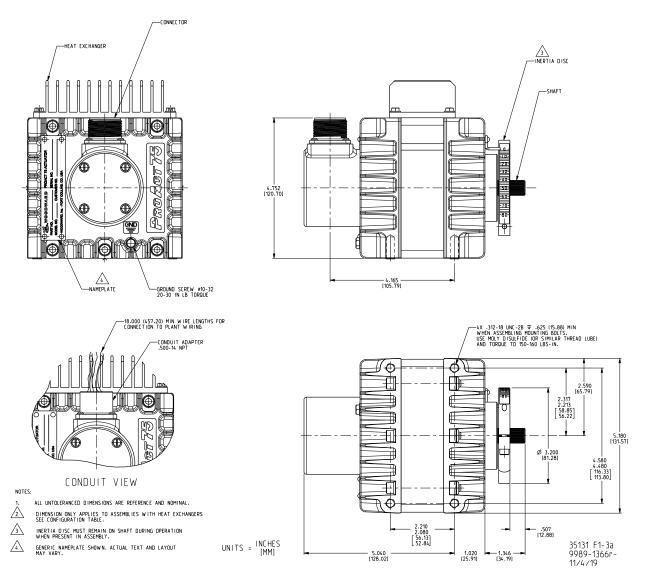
Outline Drawing of ProAct I or II Actuator
